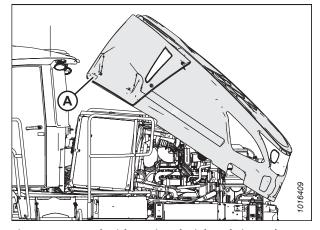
Hood with Optional High Debris Cooler Intake Kit
